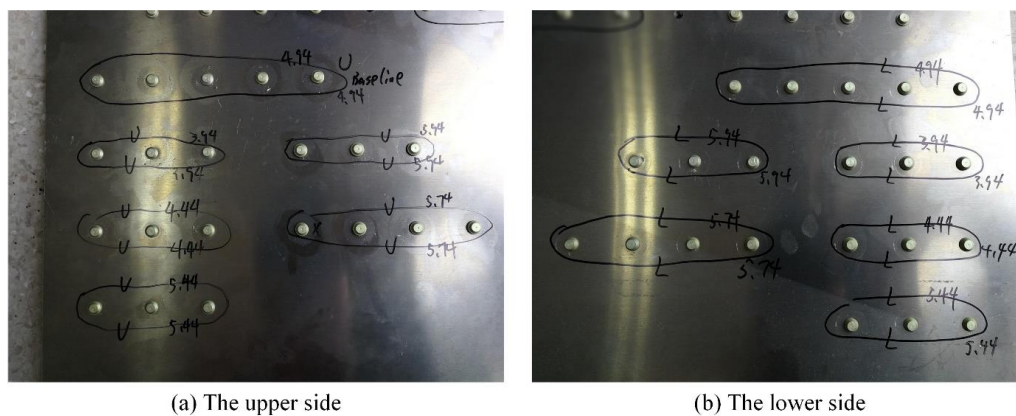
The specimen after riveting. (a) The upper side; (b) The lower side.
